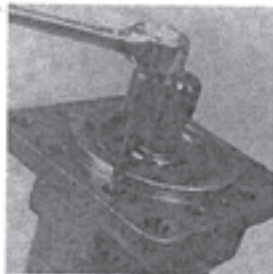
Remove Screws Holding Flange to Housing (SAE)
